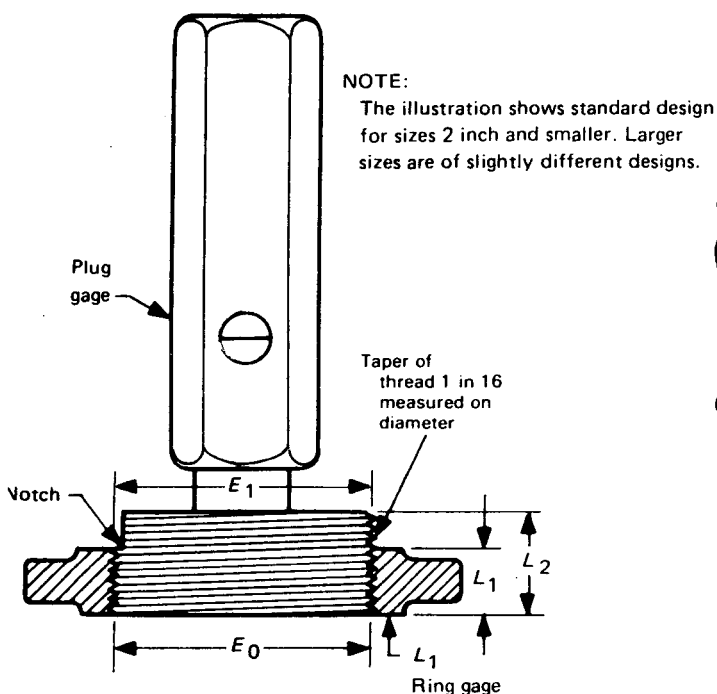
NPT STANDARD TAPER PIPE THREAD
